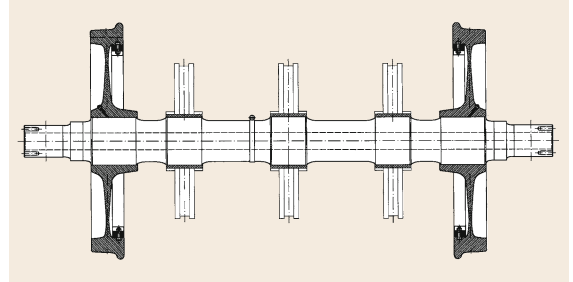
High-speed wheelset with seats for three brake disks and wheels with sound absorbers. The shaft is hollow-bored for weight reduction and to enable ultrasonic crack detection, wheel diameter 920 mm new, gauge 1435 mm, weight 948 kg without brake discs (Bochumer Verein, BVV, Bochum)
